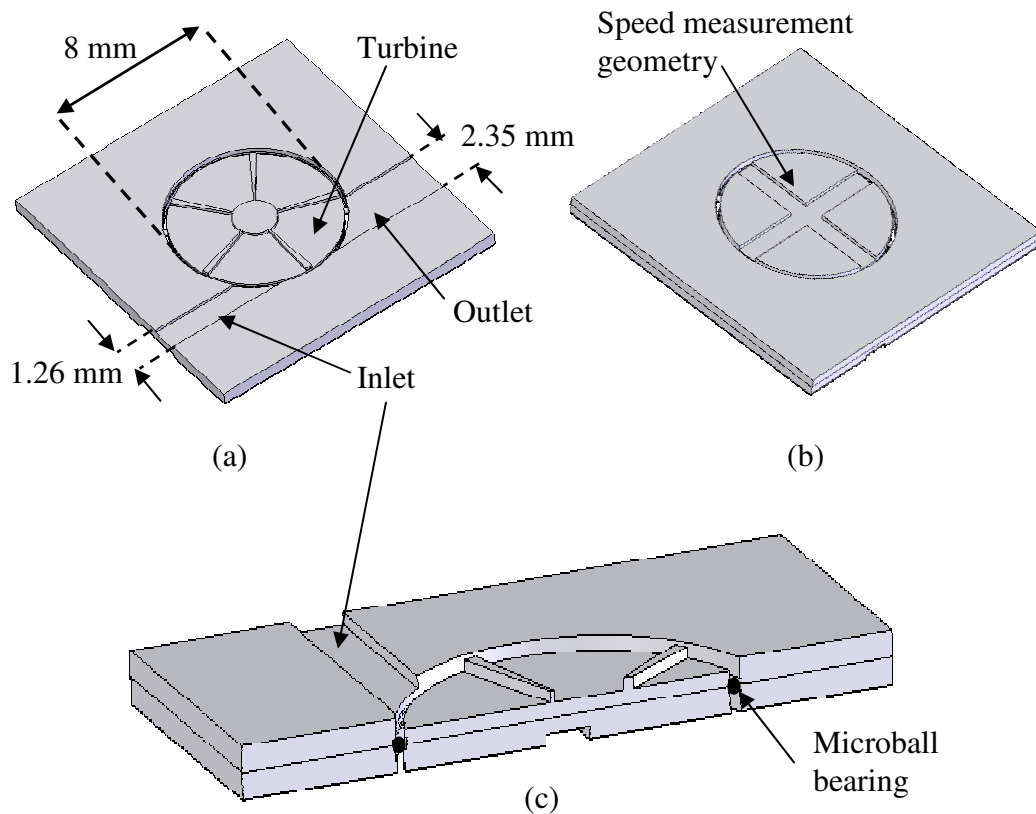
Schematic drawing of a tangential air turbine design for microball bearing characterization: (a) tangential air turbine design on one side, (b) measurement geometry on the other side, and (c) cross-sectional view.
